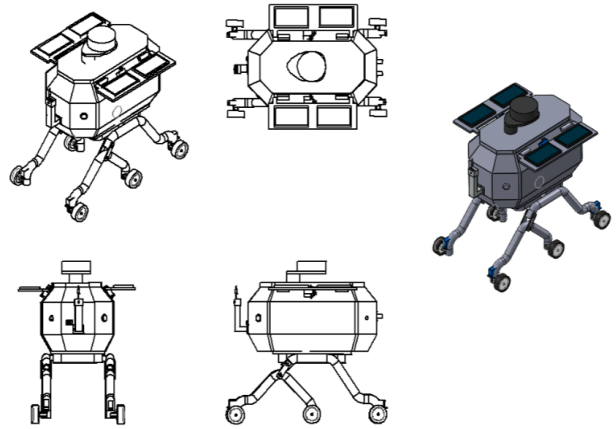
Technical drawing of the design in SolidWorks with orthogonal views
